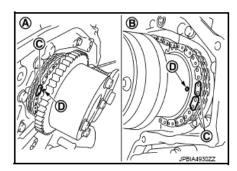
Identifying Sprocket Teeth Matching Marks Courtesy of NISSAN NORTH AMERICA, INC.
